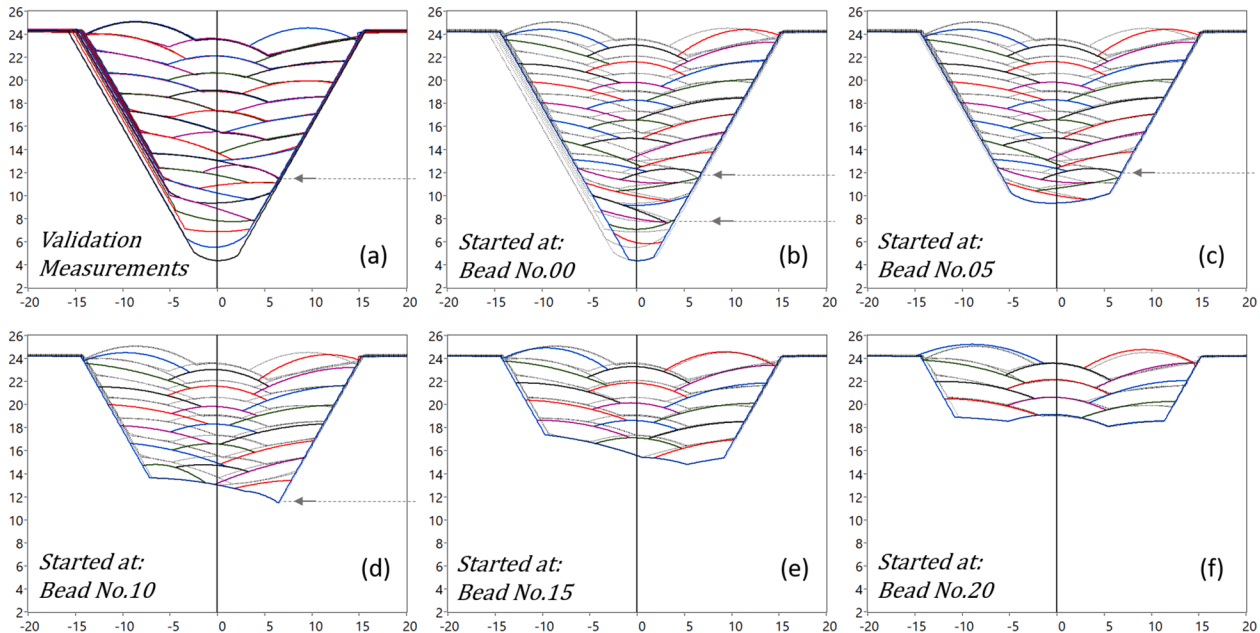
Plot of (a) the measured bead surfaces and (b)-(f) the estimated bead surfaces in a constant cross-section groove (CG). Gray arrows show the welding defect sensitive locations.
